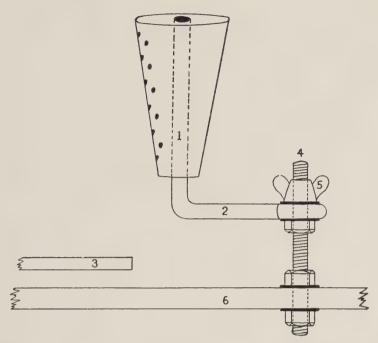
Jamb-Peg Assembly, Professional Style. 1, jamb peg; 2, right-angled carrying rod; 3, lap; 4, threaded stand rod; 5, wing nut; 6, bench top.
